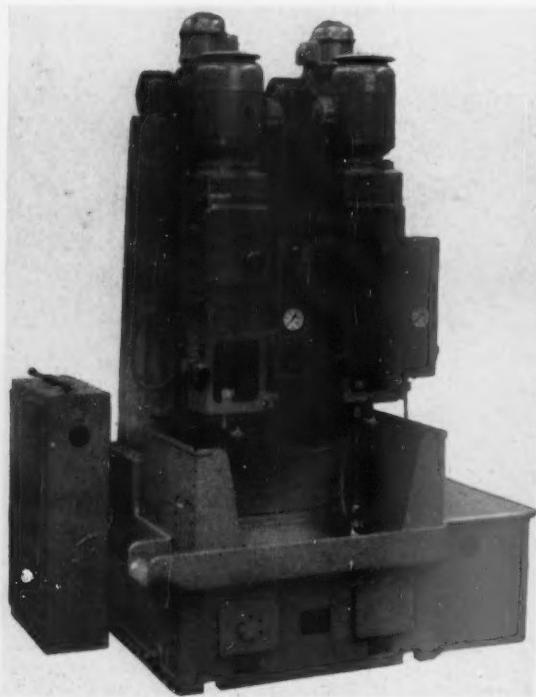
A Hille deep-hole boring machine fitted with a Beisner type cutter head for boring finished-machined spindles
